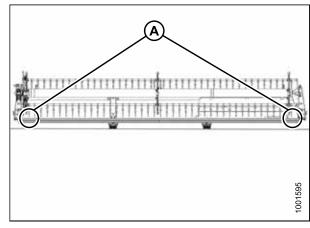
FlexDraper® Measurement Locations – Single Reel
